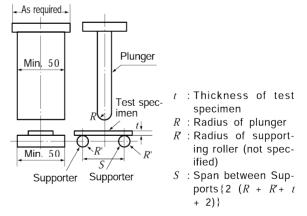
Jigs for Roller Bend Test (Unit: mm)
